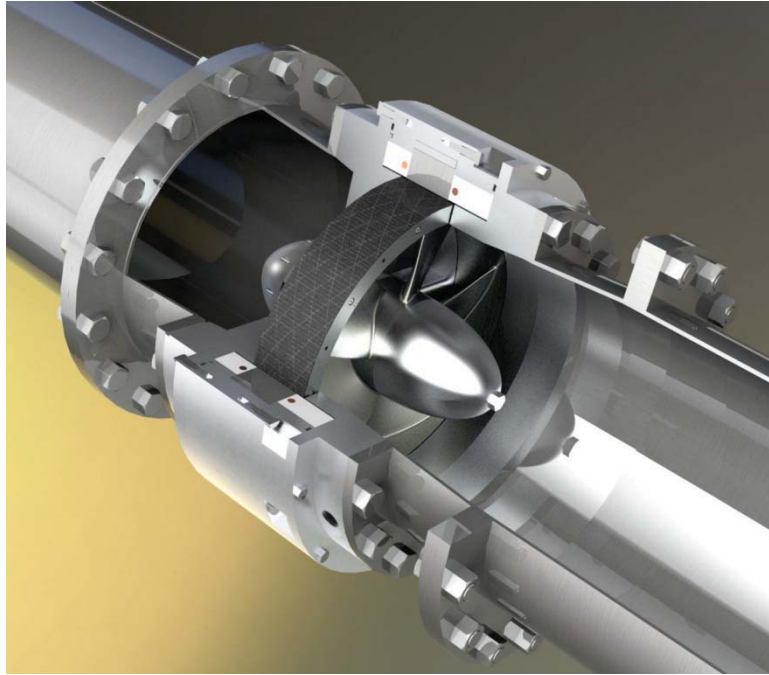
A cutaway view of the turbine-generator installed in a section of pipe.
